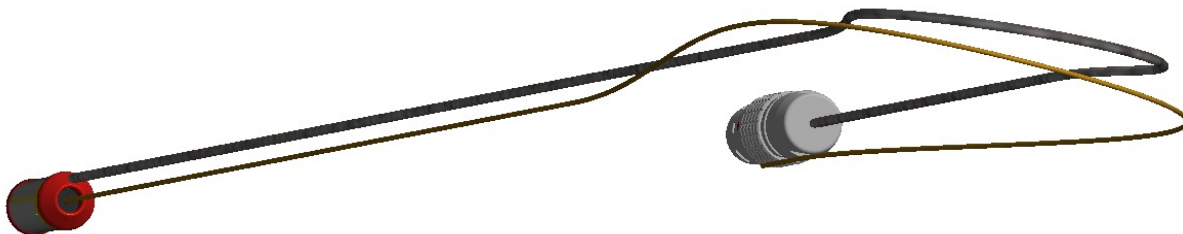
Starbug assembly showing Starbug (left) with vacuum tubing terminating in a COTS electrical connector. The fibre bundle runs separately.
